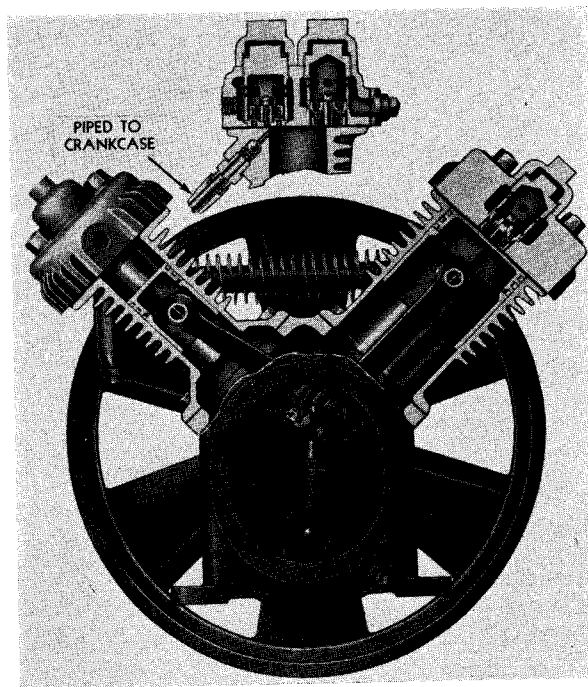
TYPE "Y" AIR COMPRESSOR—END VIEW AND HIGH PRESSURE CYLINDER HEAD SECTION
